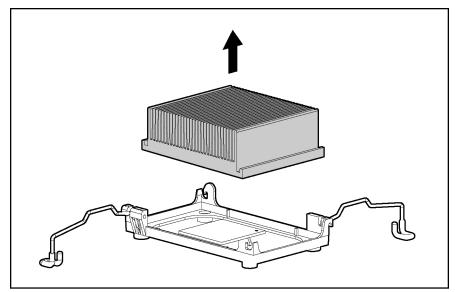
Removing the heatsink (both retaining clips disengaged)
